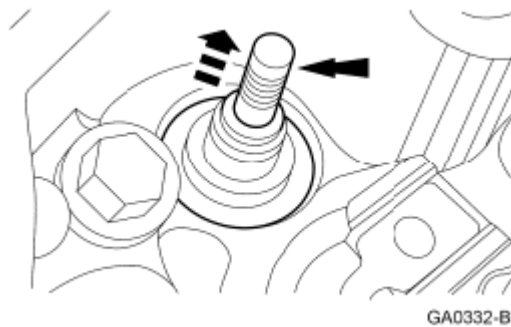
Installing Valve Seal Using Valve Stem Oil Seal Installer
